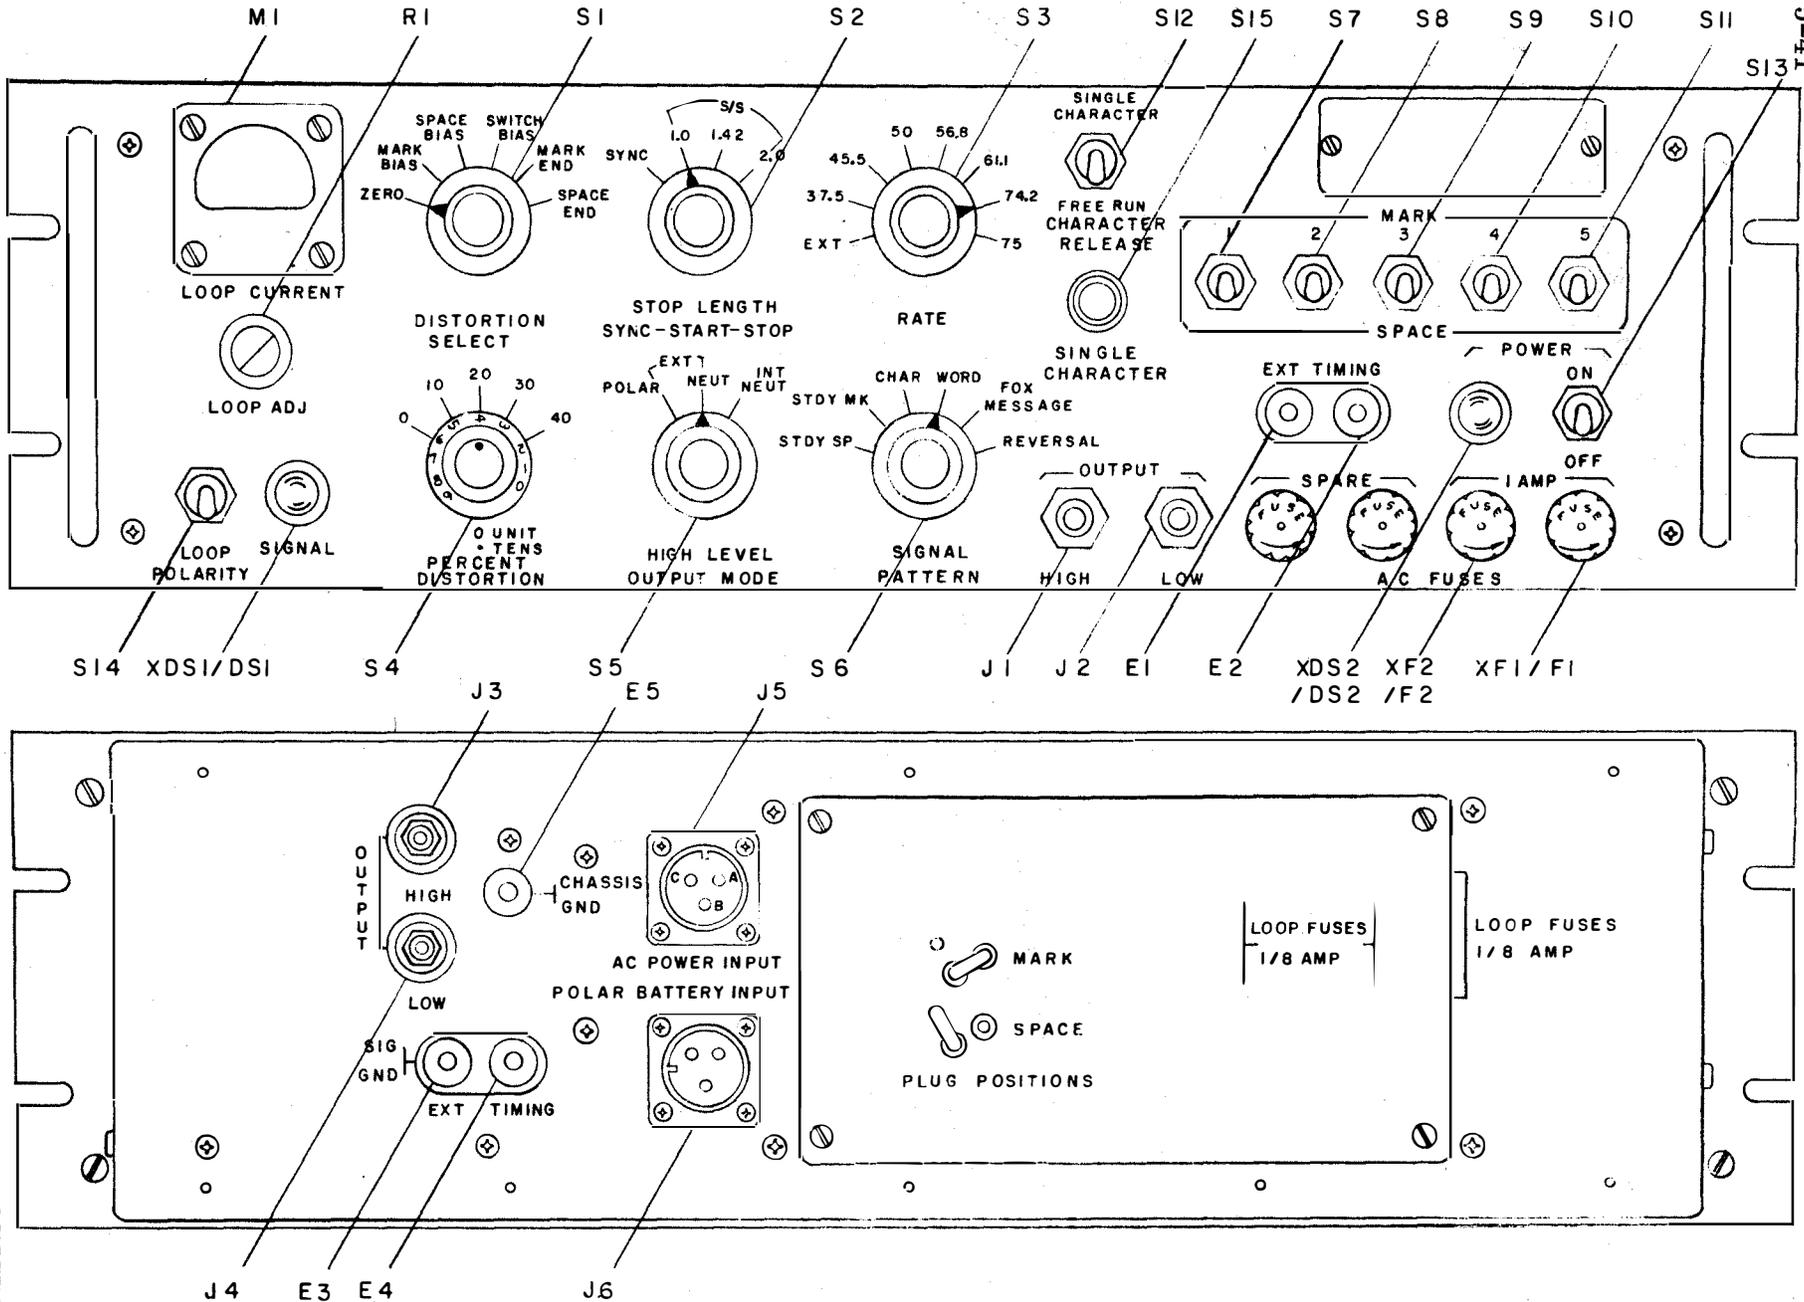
Chassis Mounted Components Location (Sheet 2 of 2)
